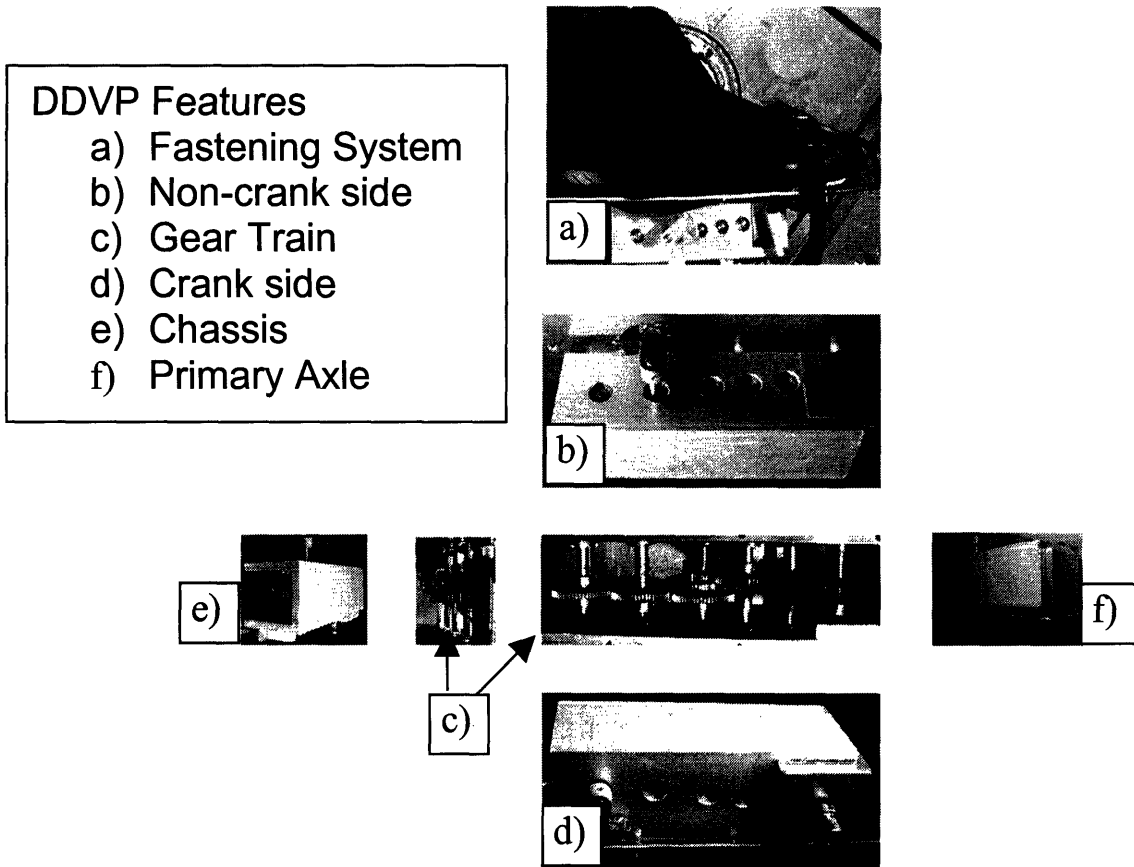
The exploded photographic view of the Direct Drive Vibration Pedal (DDVP).
